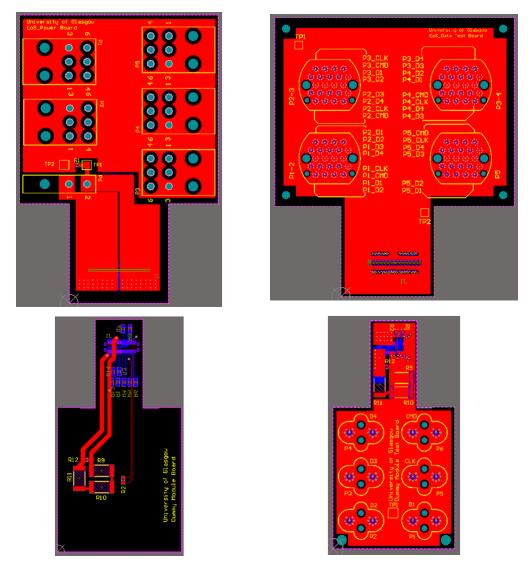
Test PCBs for testing the Crescent Tape. Top left - EoS Power Board. Top right - EoS Data Test Board. Bottom left - Dummy Module Board. Bottom right - Dummy Module Test Board.
